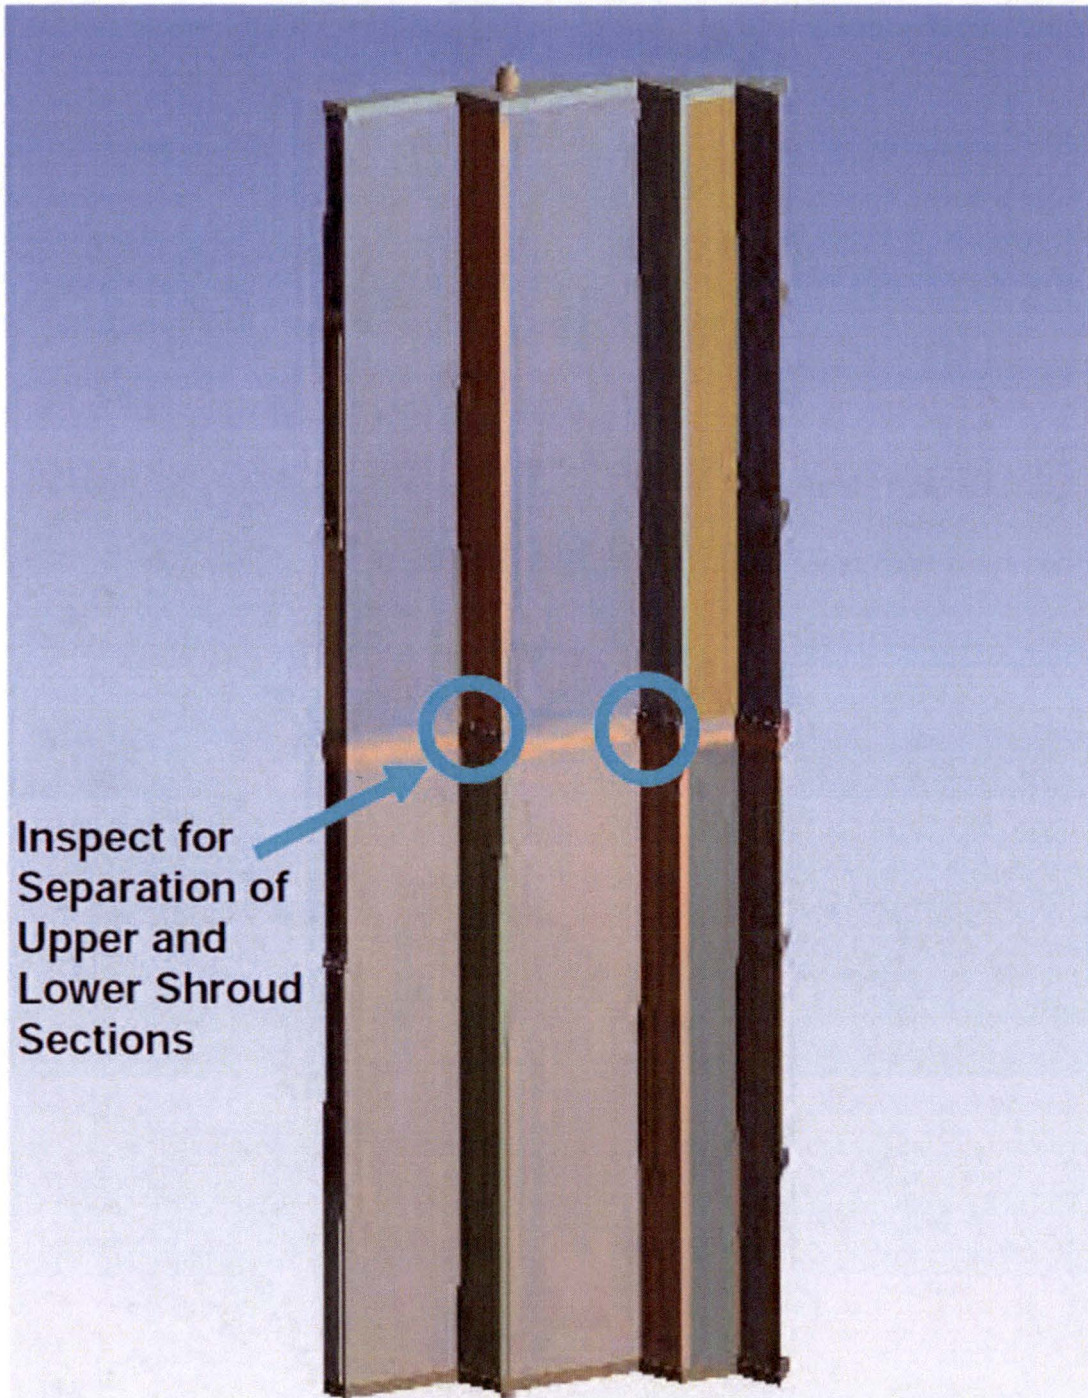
Locations of Potential Separation Between Core Shroud Sections Caused by Swelling Induced Warping of Thick Flange Plates in CE Welded Core Shroud Assembled in Stacked Sections [4, Figure 4-14]
